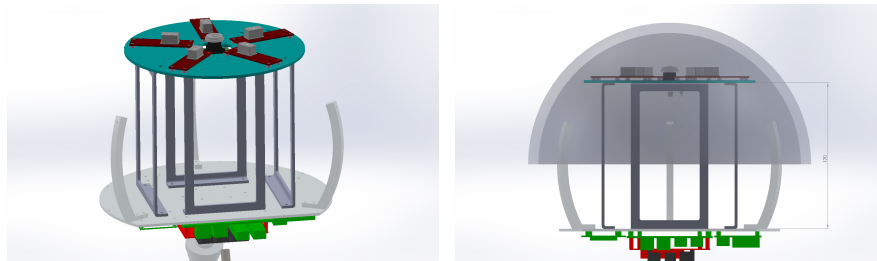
Technical drawings of the Minispectrometer Module internal mechanics. Courtesy of Laszlo Papp.
